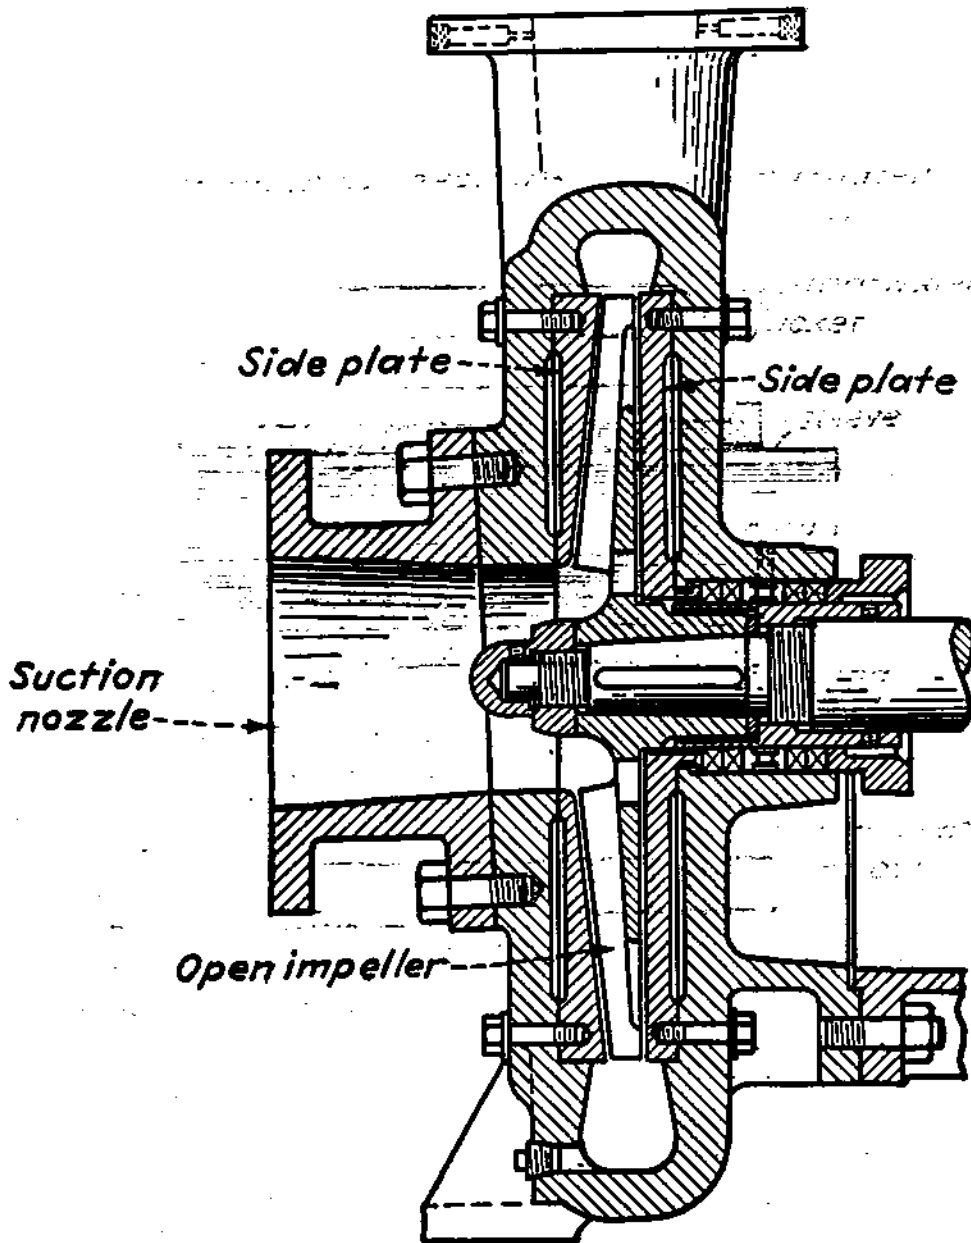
Section of end-suction pump with open impeller and side plates.
